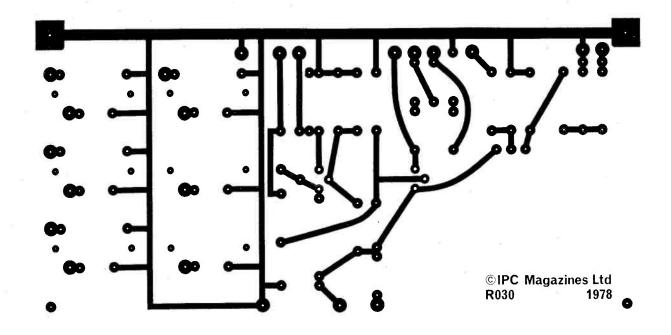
Copper track layout of the printed circuit board, shown actual size
